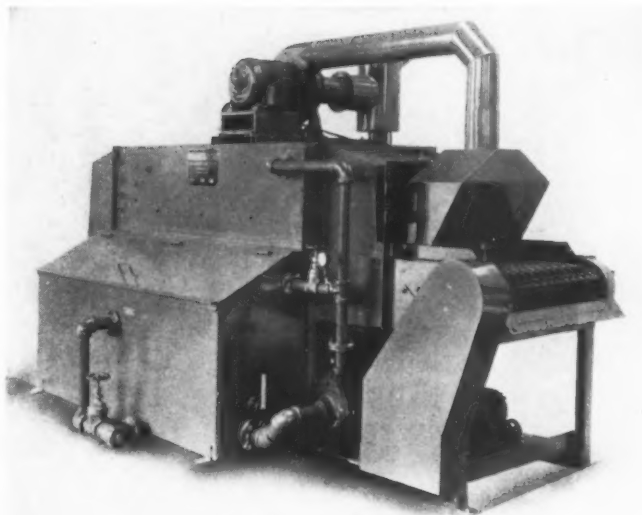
As each individual unit of these machines varies, welding is widely employed
